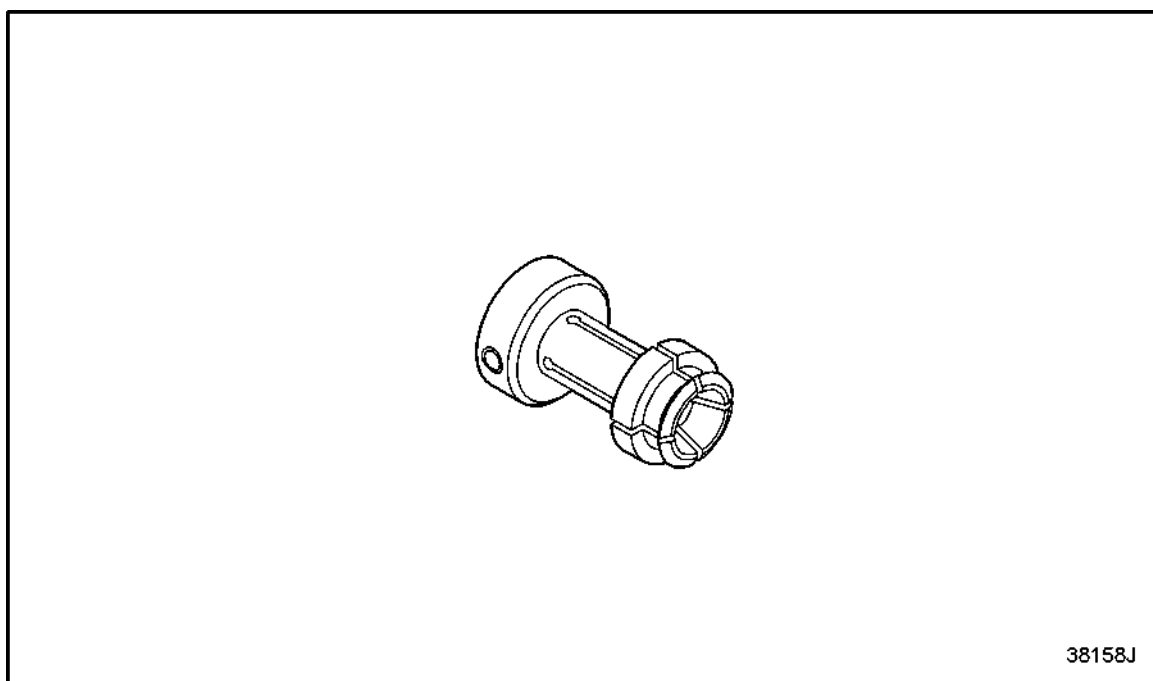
Valve Seat Insert Puller Collet (2 Valve),J 23479-27
